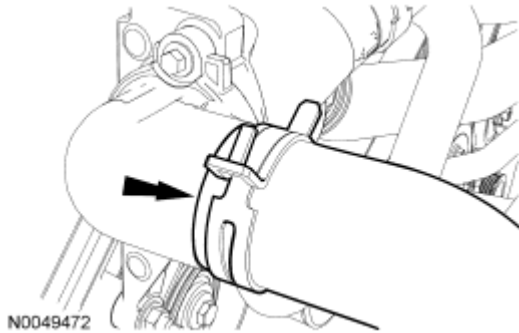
Disconnecting Upper Radiator Hose From Thermostat Housing
